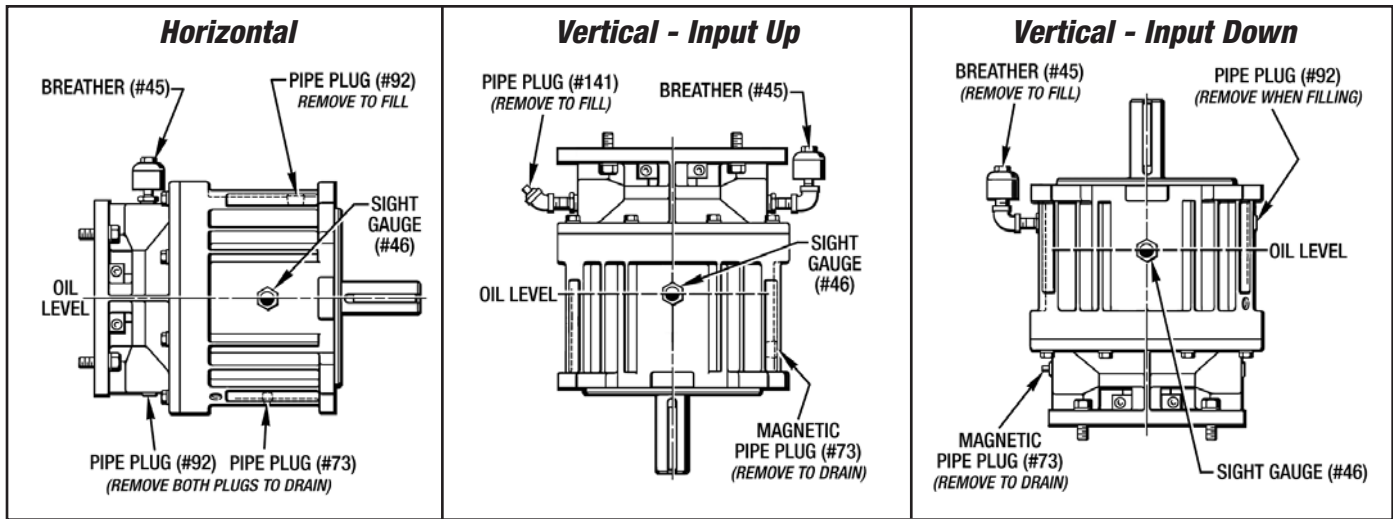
Lubrication (XB5 and XB6 Motor & Coupler Brake)
